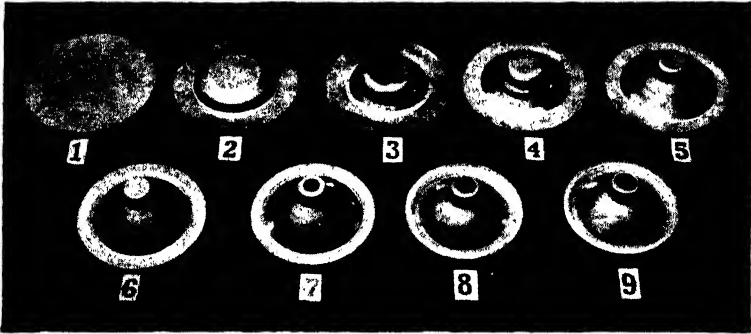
Parts, from blank to finished piece, showing the successive steps in producing a small cup or drawn part.
